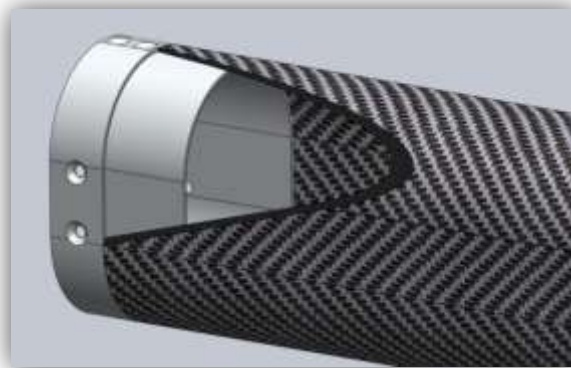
Figure Showing Cut-away of Carbon Tube with Aluminium Insert
